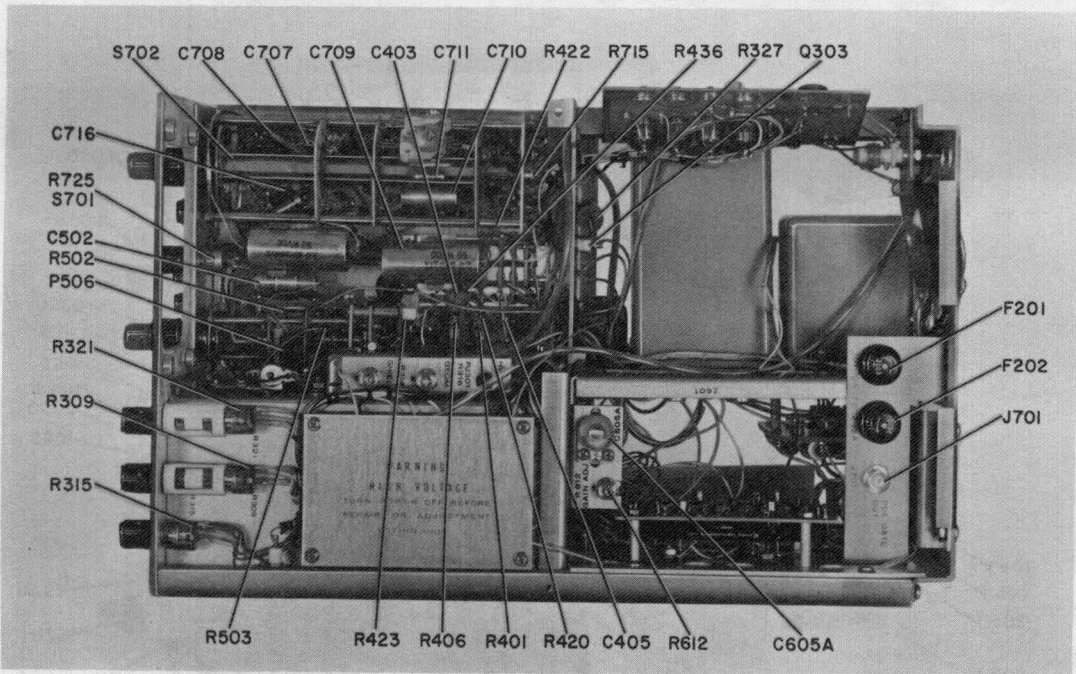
Oscilloscope AN/USM-117A, 117B, Chassis Assembly, Top View
